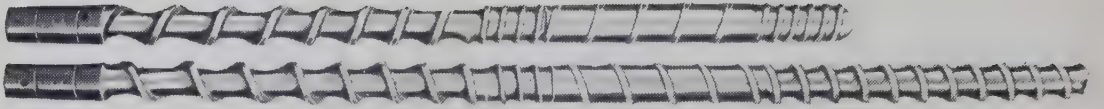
Screws of the compounding extruder by Welding Engineers, Inc.
